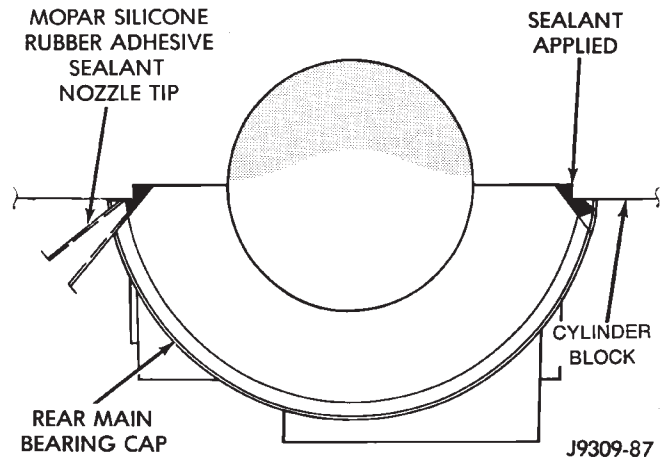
Apply Sealant to Bearing Cap to Block Joint
